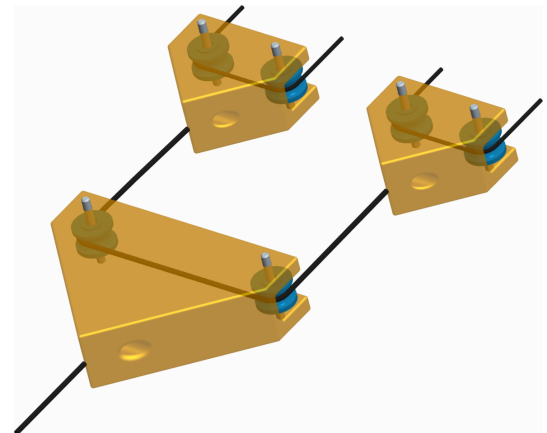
CAD MODEL OF THE DOUBLE-STAGE FLOATING-PULLEY MECHANISM.
